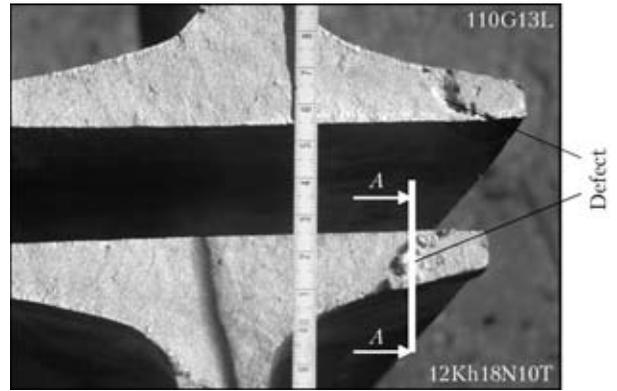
Appearance of defects in the fracture surface of specimen: A-A – scheme of cutting out of section from the specimen
